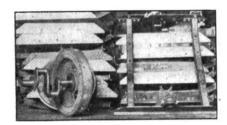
FLY WHEEL, CRANK SHAFT AND MOTOR FRAME
